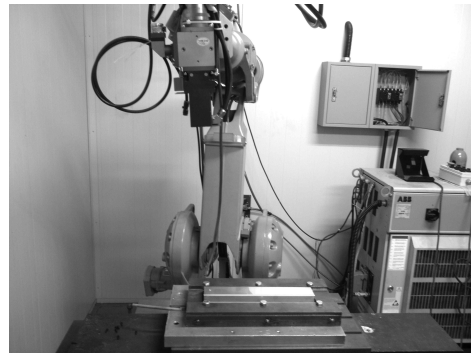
Yb: YAG laser welding machine of TRUMPF Inc
